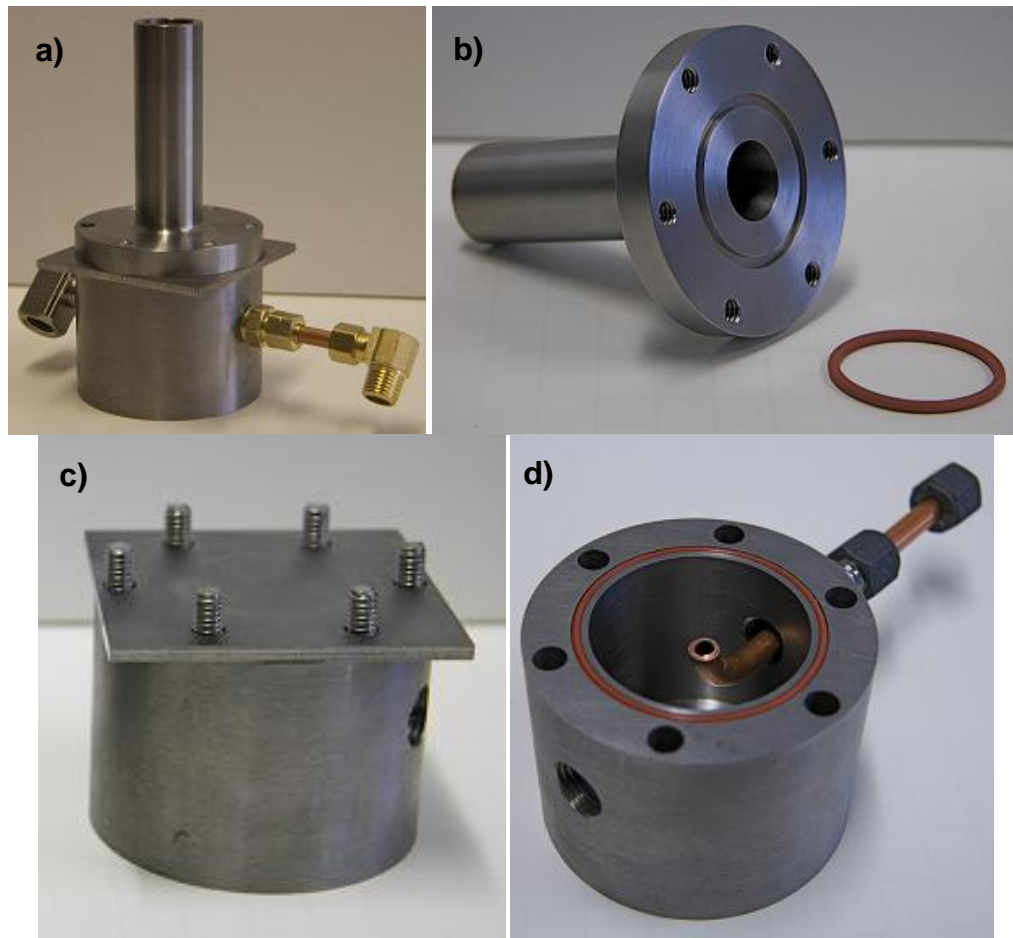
a) Mold apparatus completely assembled; b) Picture of the die part showing the utilized O-ring and its groove; c) Bottom part of the mold together with the chill plate and; d) Picture showing the water pipes pointing straight to the chill plate and the O-ring placed on the water reservoir.
